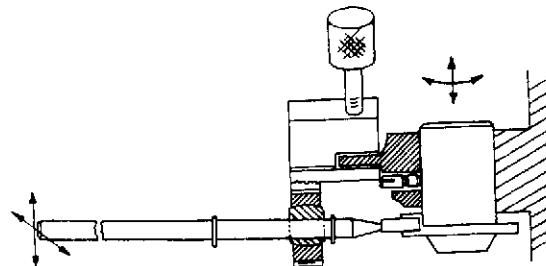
OPTIONAL SOUND OPTICS ADJUSTING TOOL
